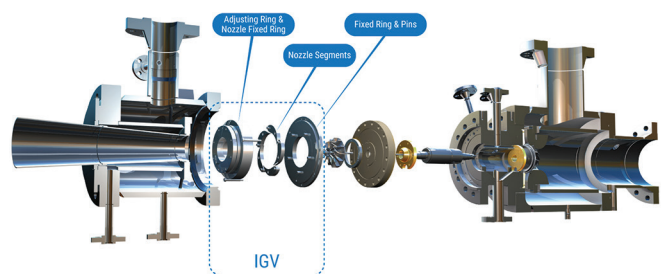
Inlet guide vane example. Image courtesy of L.A. Turbine.
